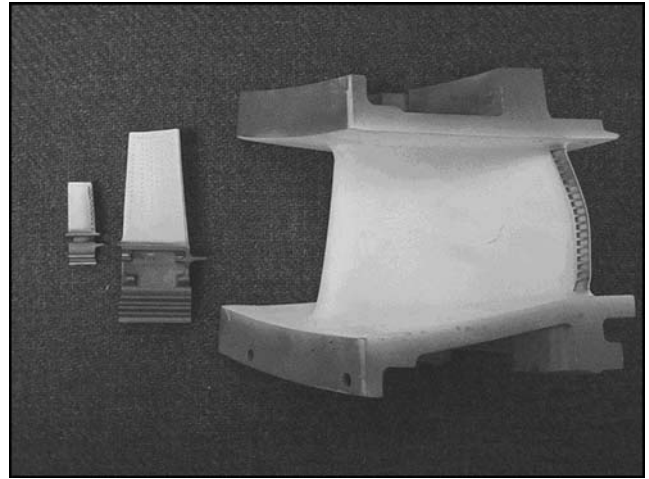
Typical aircraft and IGT parts coated with EBPVD TBC. The part in the center is a CF6-80C2 1st stage HPT blade, the part on the left is a CF34 1st HPT blade, and the part on the right is a GE Power Systems Frame 6 Nozzle
